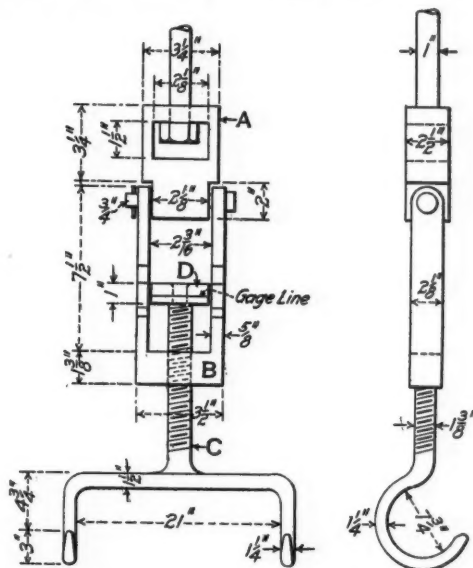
Collar for Handling Axles into Double Head Lathe.
